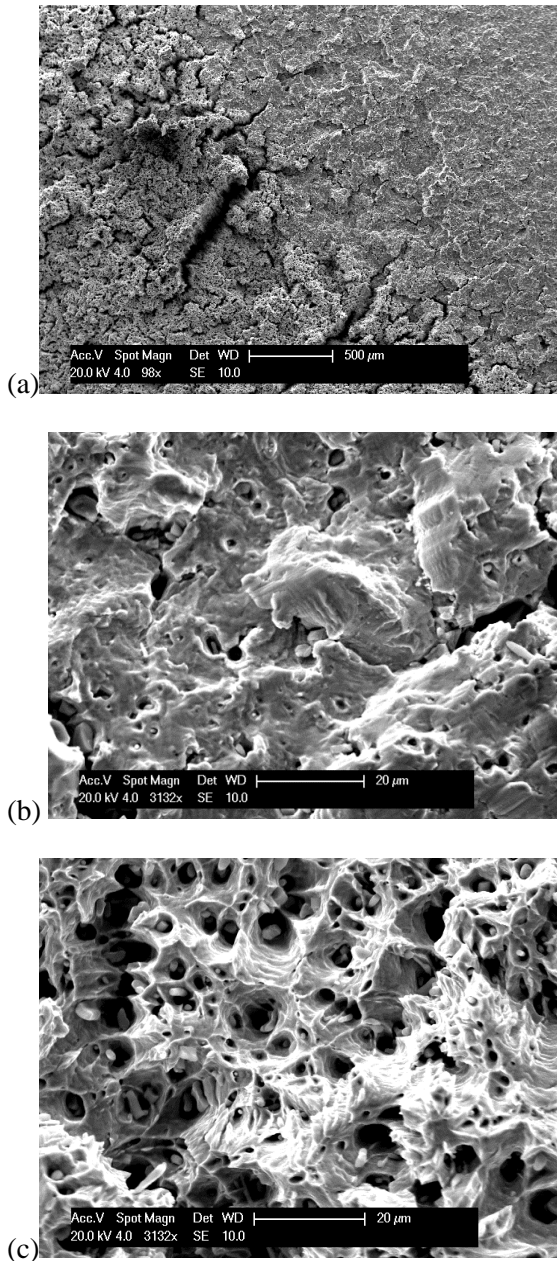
(a) SEM image of the fractured surface showing the two different types of fracture occurred in fatigue test for 0.5%; (b) Upper right part bright and smooth, fatigue striations, evident inclusion and holes; (c) lower left part dark, dimpled surface.
